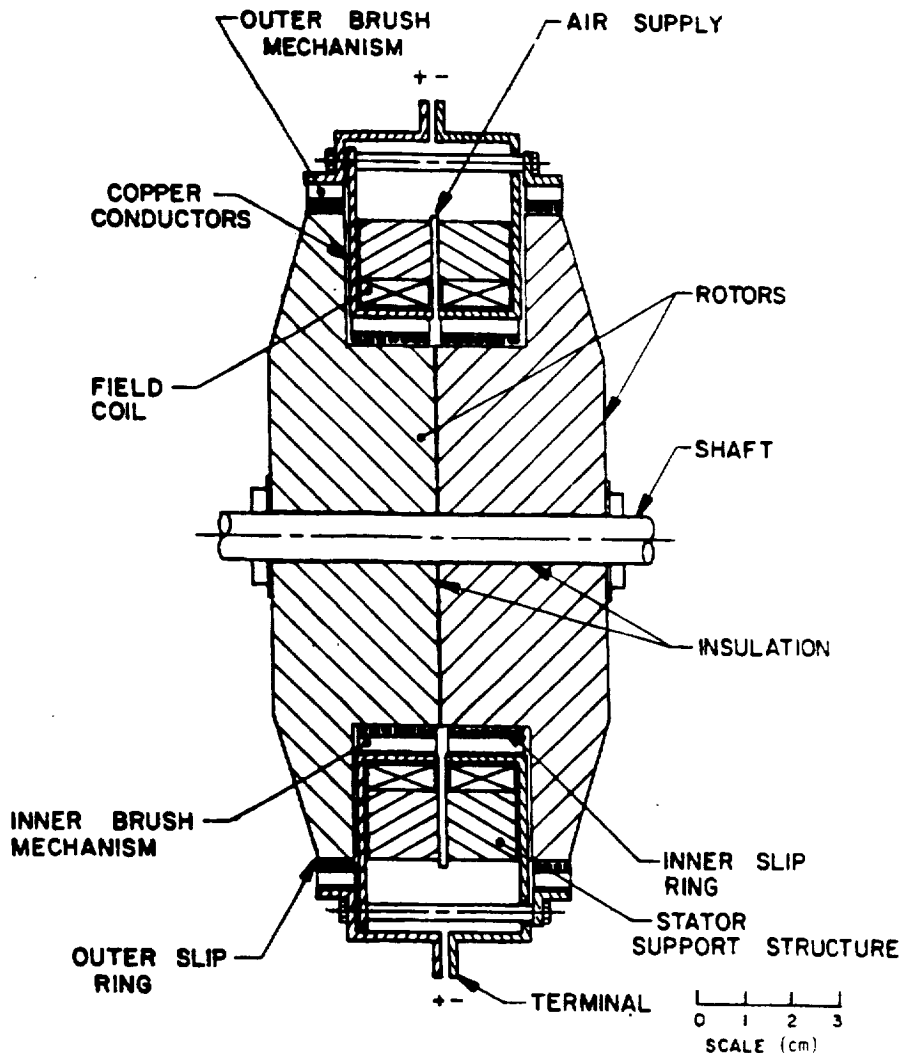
CROSS-SECTION VIEW OF THE 6.25 MJ AIR HPG
